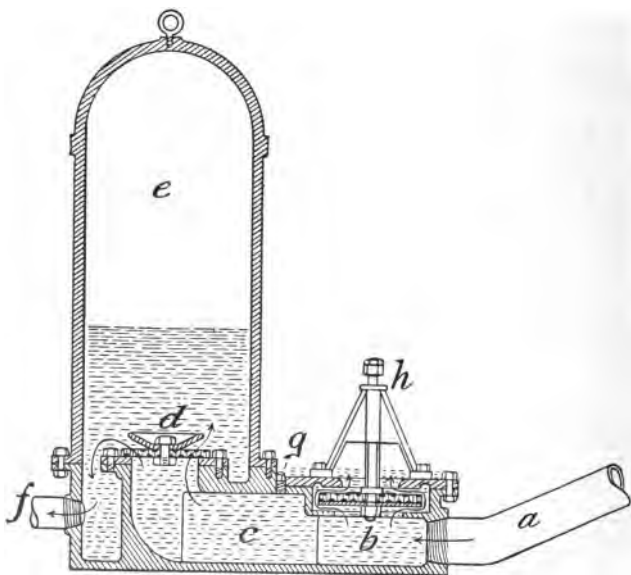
A simple type of hydraulic ram. a, intake pipe; f, delivery pipe
